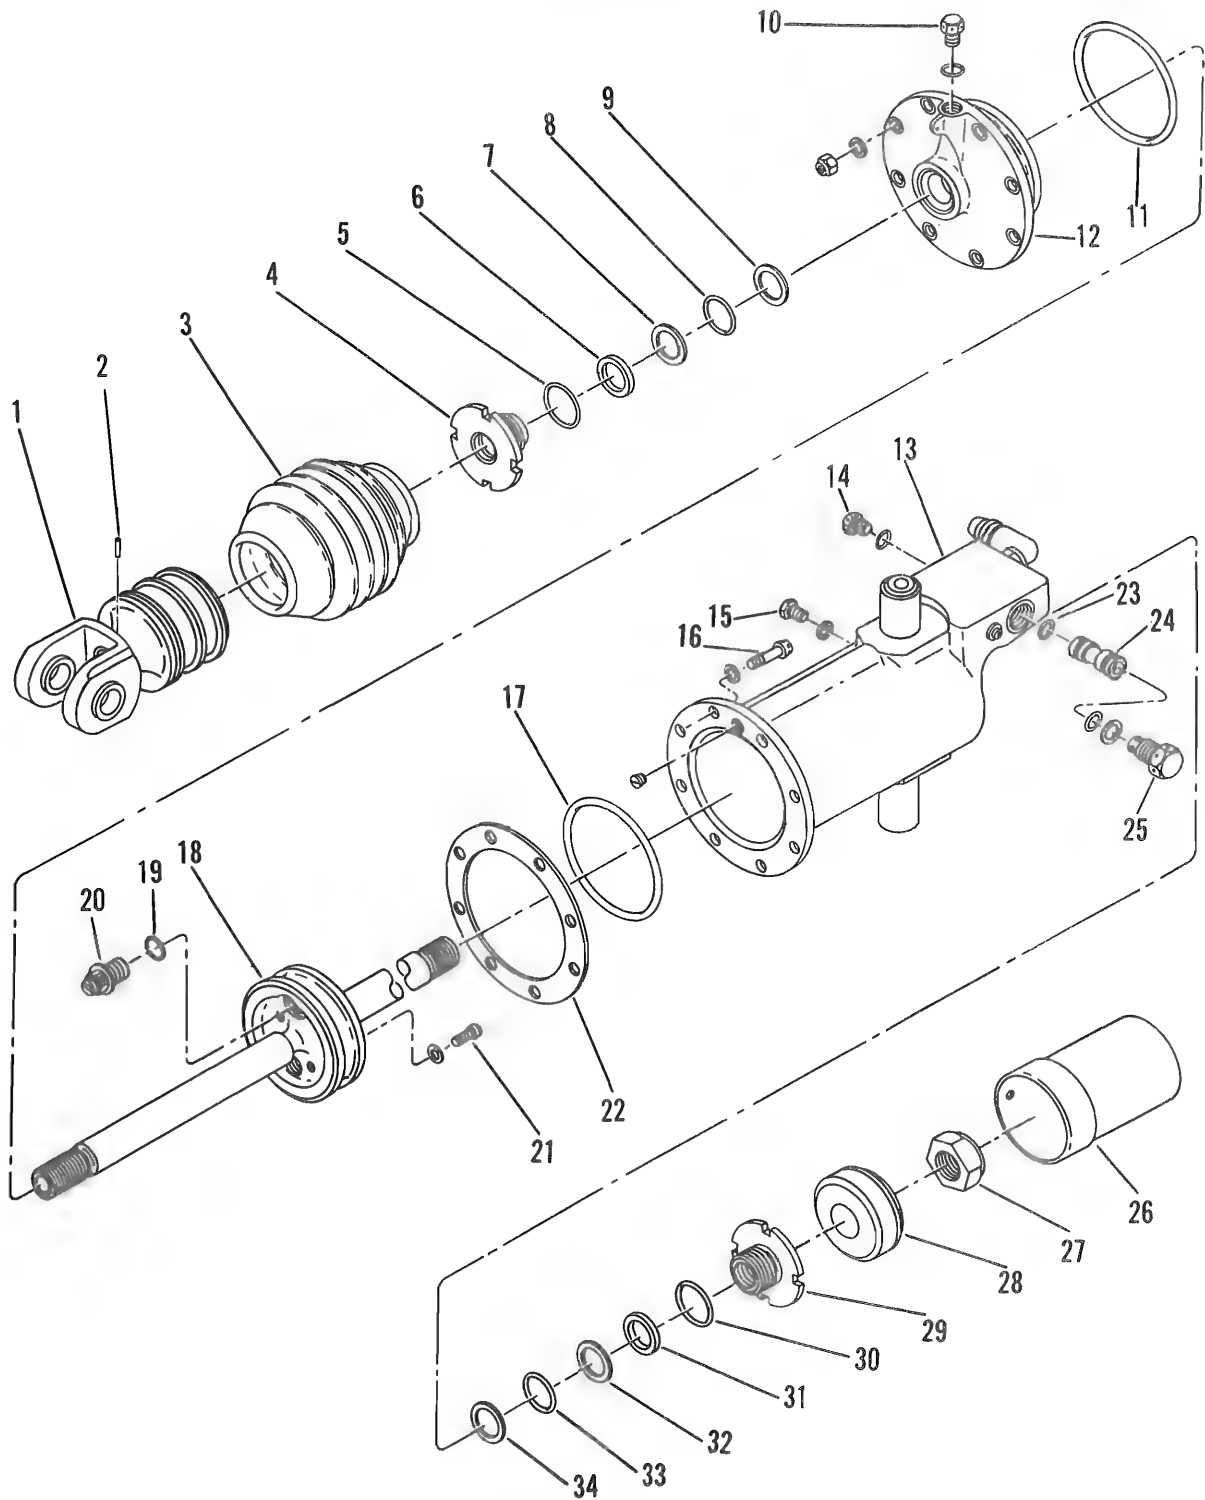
Damper Assembly - Disassembled (Sheet 2 of 2)
